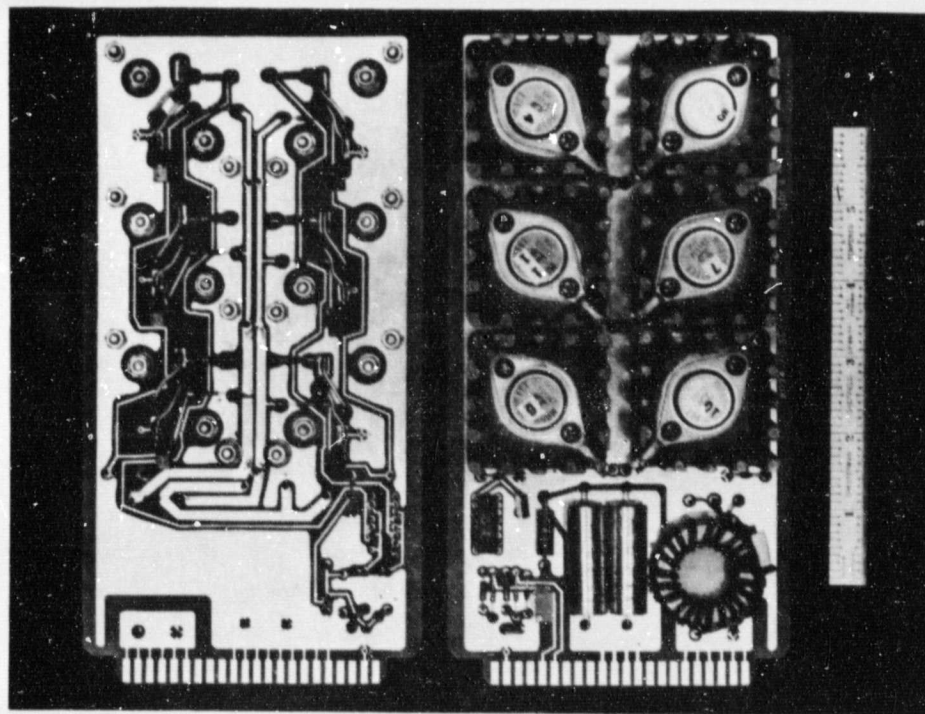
Transistor Base Drive Power Oscillator Circuit Card Assembly
